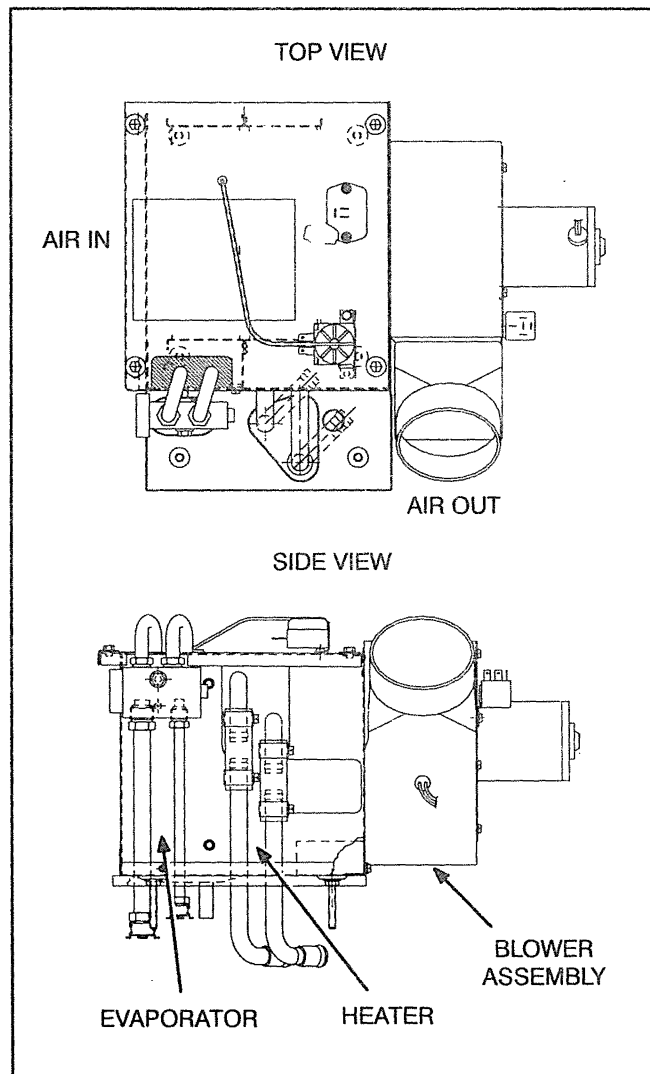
COMPLETE EVAPORATOR/HEATER ASSEMBLY
